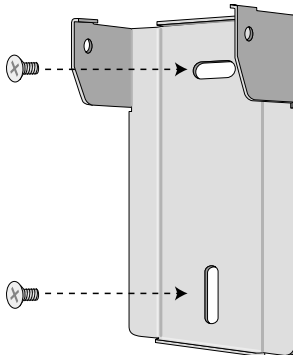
Attaching the Wall-mounting Bracket to the Wall
